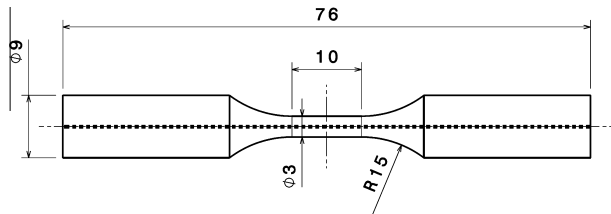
Specimen geometry for the cyclic fatigue tests with dimensions in mm.
